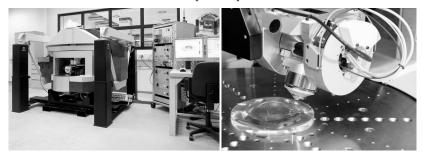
Measurement machine prototype and optical probe measuring convex lens
